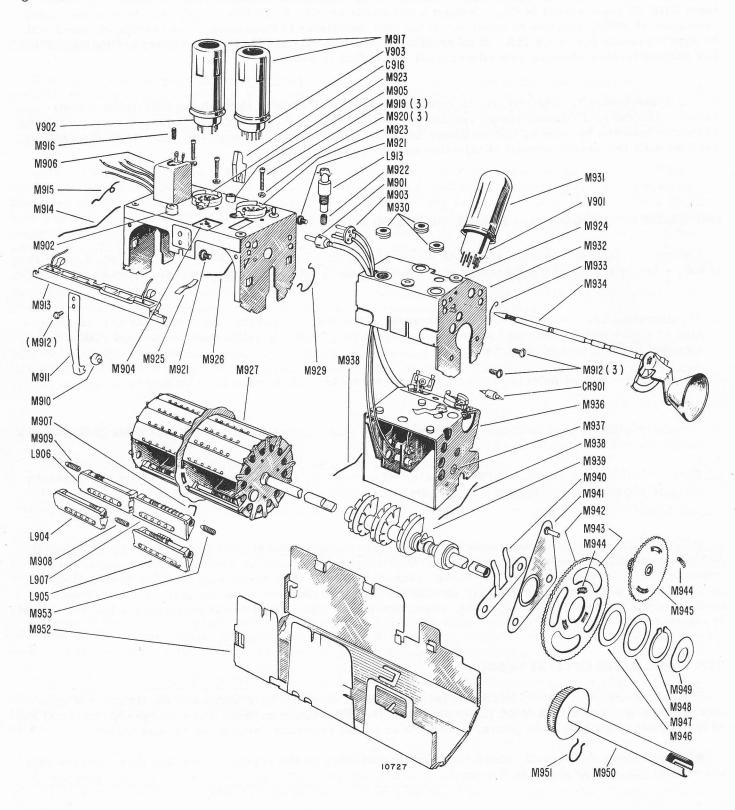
Exploded View of VHF-UHF Tuner 94E107-1.
